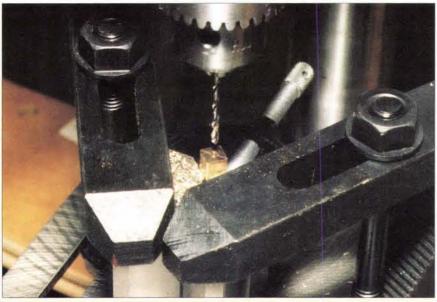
V-block clamped to drill press table for drilling the follower nut.
